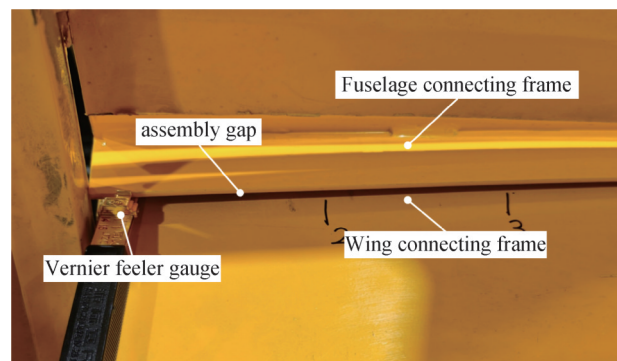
Schematic diagram of assembly gap measurement between assembly frames
